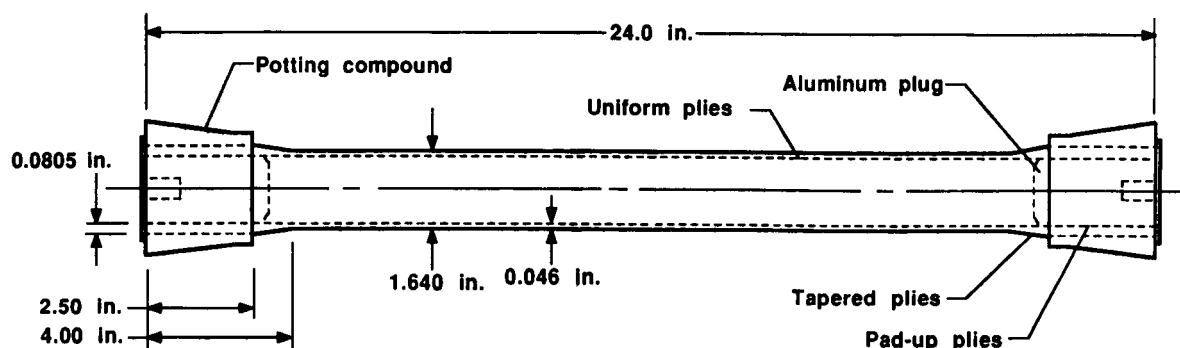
Sectional view of T300/5208 Gr/E tube
